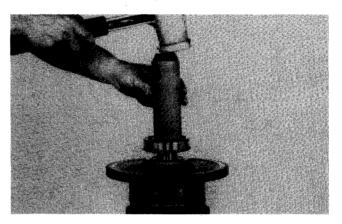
Install 3rd speed clutch shaft rear bearing. NOTE: Bearing outer diameter locating ring must be down.
